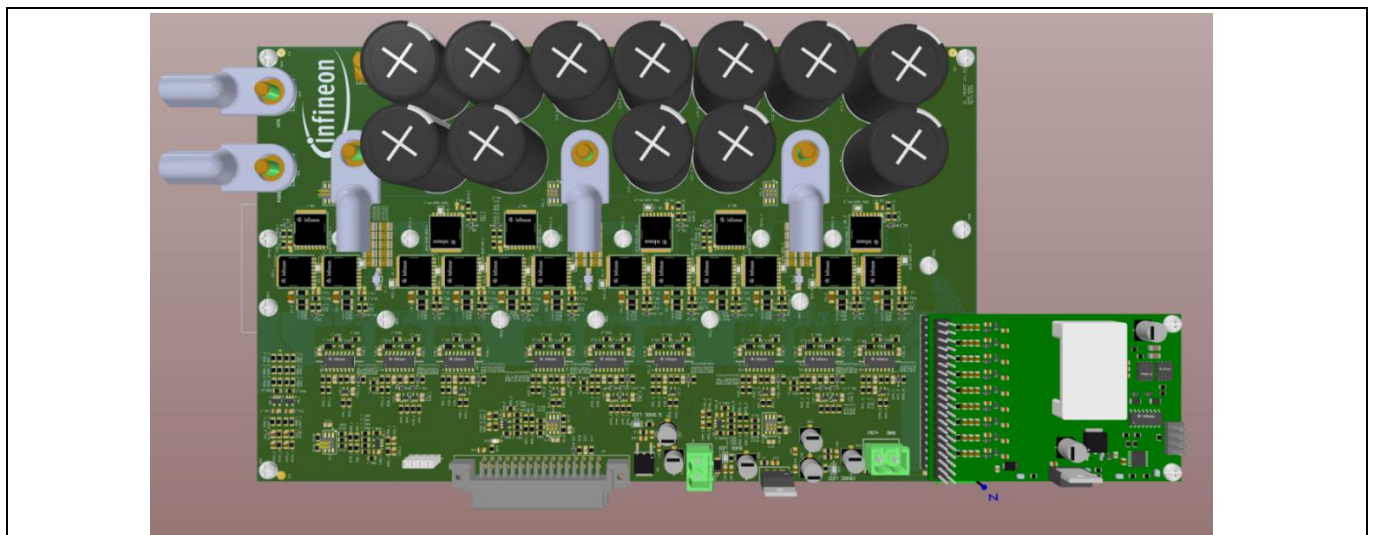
EVAL_10KW_3LANPC_SIC assembly
